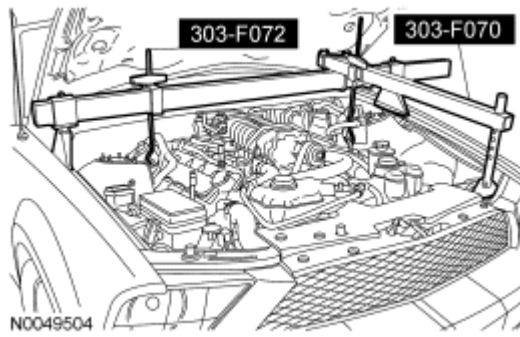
Raising Engine Using Special Tools (303-F072) & (303-F070)
